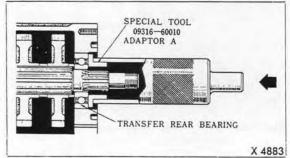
Installing the transfer rear bearing on the spline shaft with special tool
